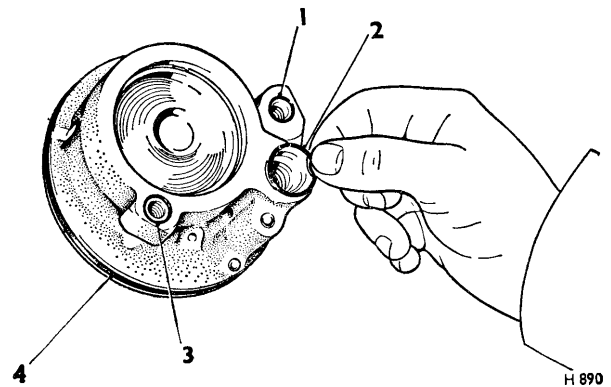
POSITION OF PUMP EXTERNAL SEALING RINGS
